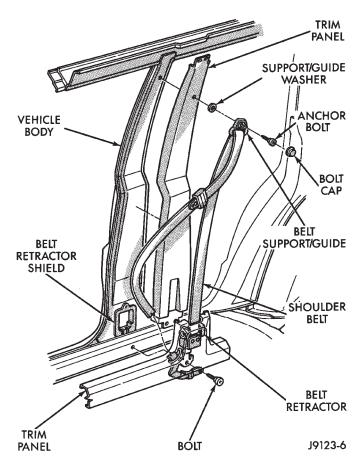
Front Shoulder Belt—4-Door Vehicles
